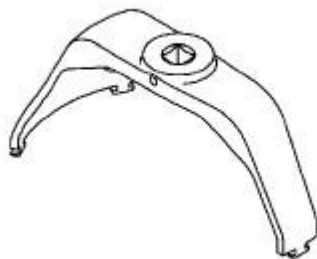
SAE Fuel Pump Lock Ring Wrench - 9340
